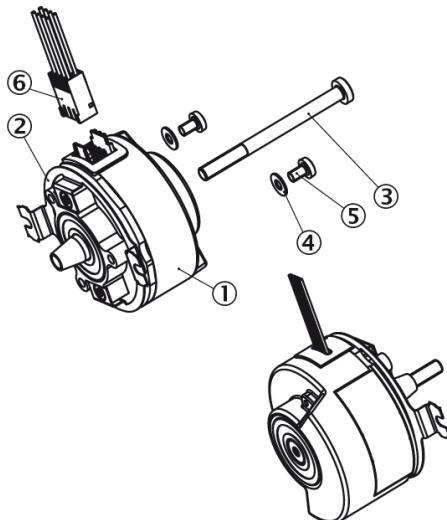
Mounting figure of SRS50S/SRM50S, conical shaft, spring plate
